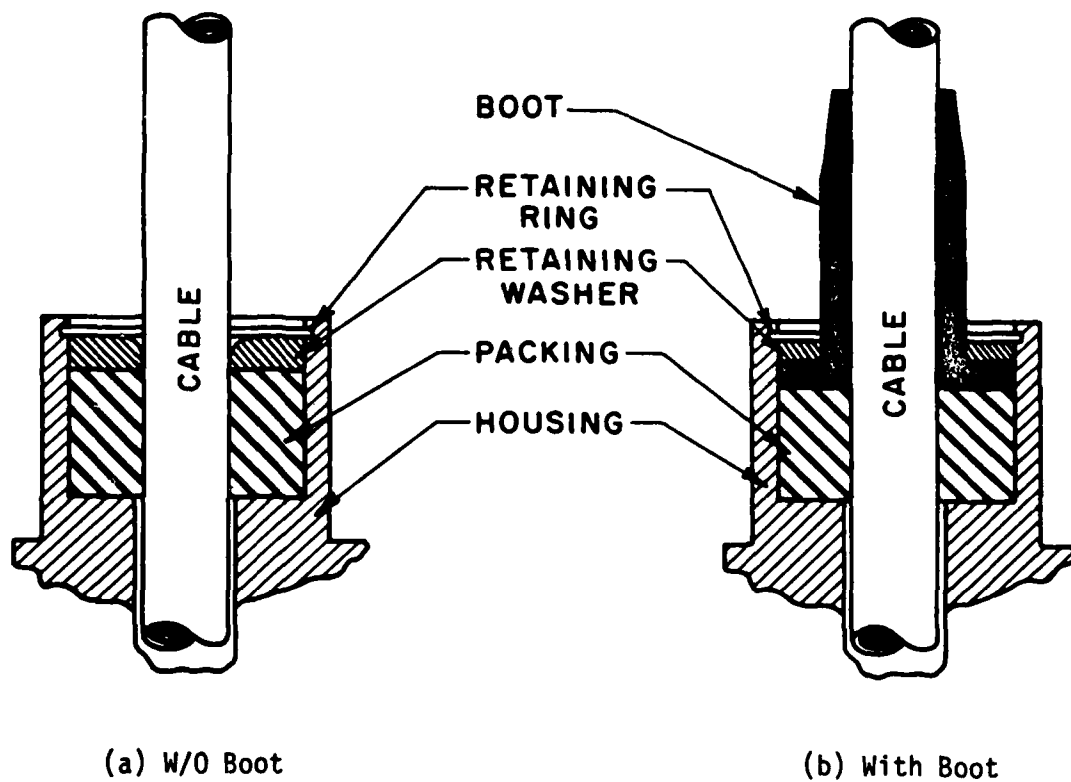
MORRISON CABLE-TO-HOUSING INTERFERENCE SEAL
